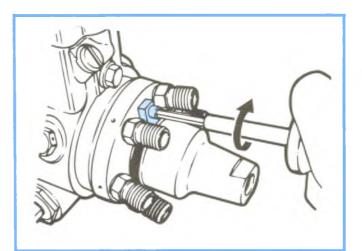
, Installing End Cap Locking Plate, Seal and Screw.
